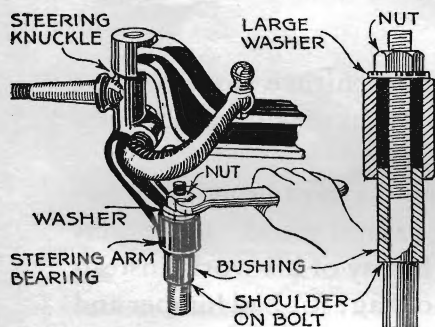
Simple method of forcing bushing into place, using special bolt with nut and washer.
